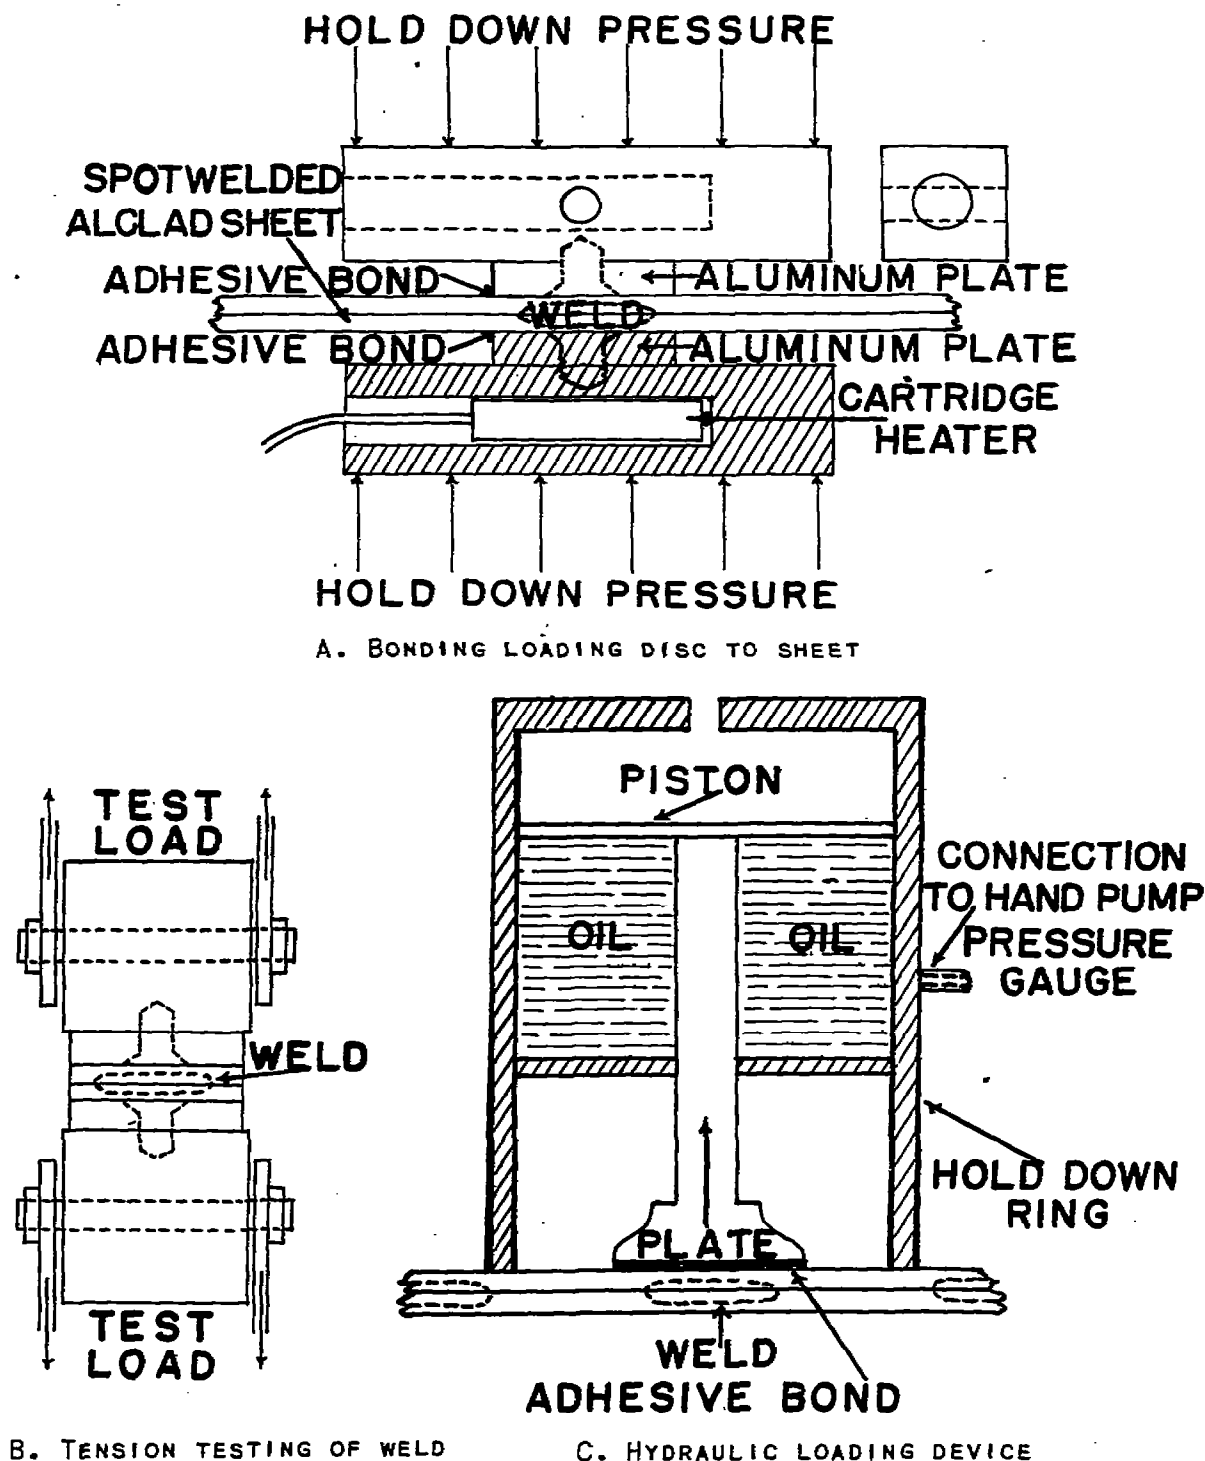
ADHESIVE BOND PROOF TEST OF SPOT WELD
